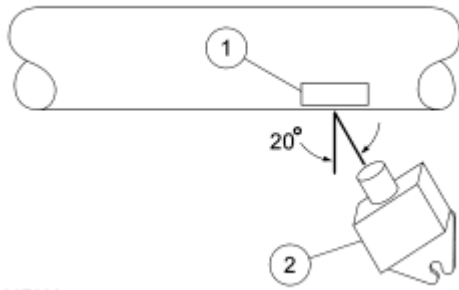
Finding Excessive Driveshaft Runout (2 Of 2)
